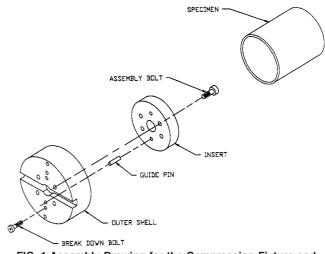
Assembly Drawing for the Compression Fixture and Specimen
